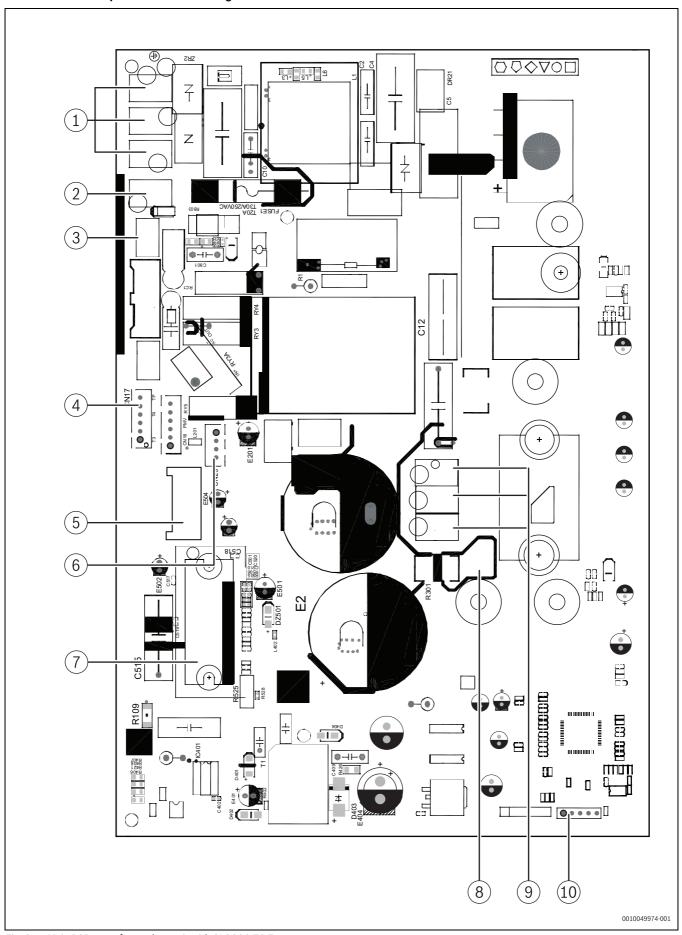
Main PCB ports for outdoor unit with CL2000 70 E
